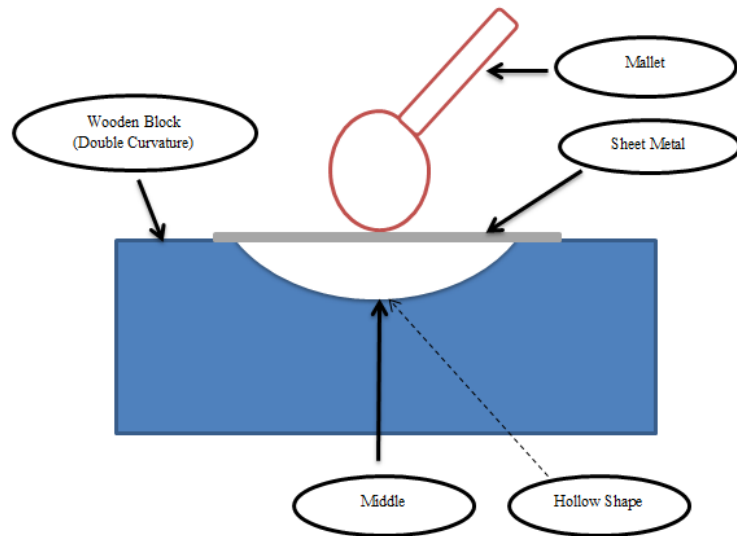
Sheet Metal held to get a hollow deformation
